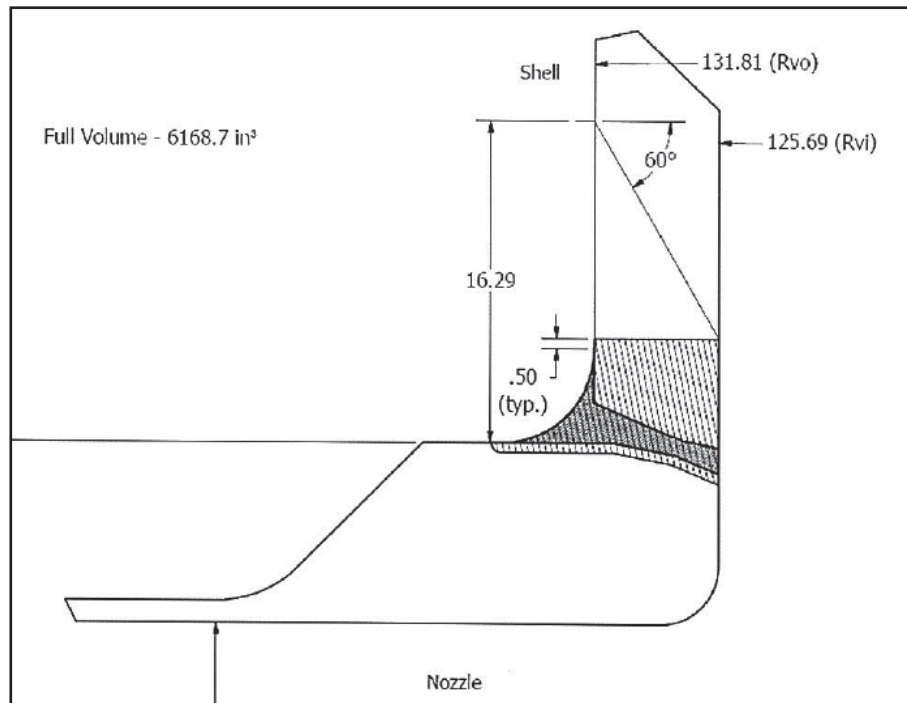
Weld N3D-NV, Full Volume Required Coverage
